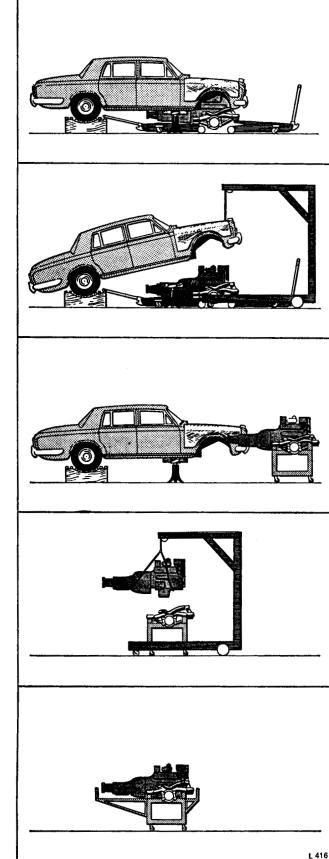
B FRONT SUB-FRAME, ENGINE AND TRANSMISSION REMOVAL
